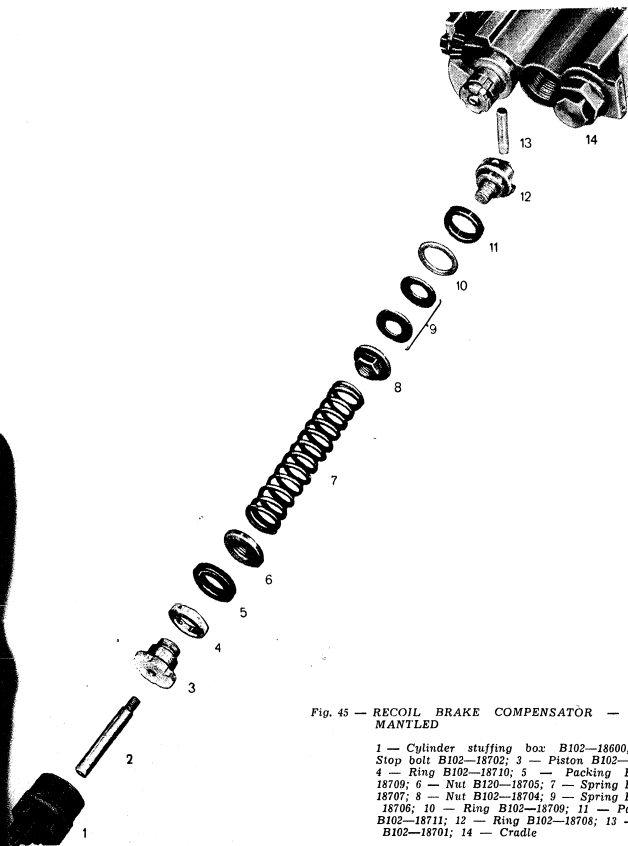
RECOIL BRAKE COMPENSATOR — DISMANTLED
